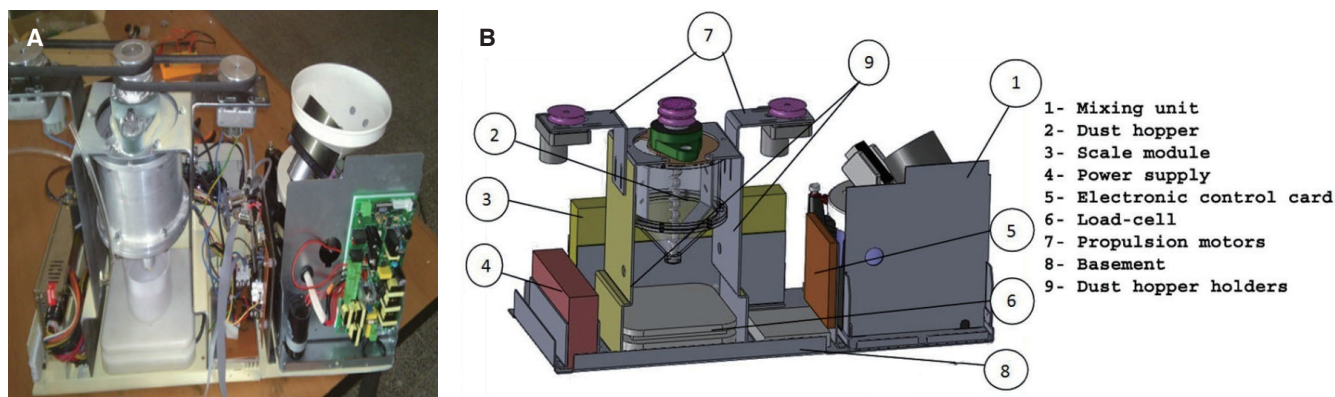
A photograph of the fully assembled device (A) and its schematic illustration (B).
